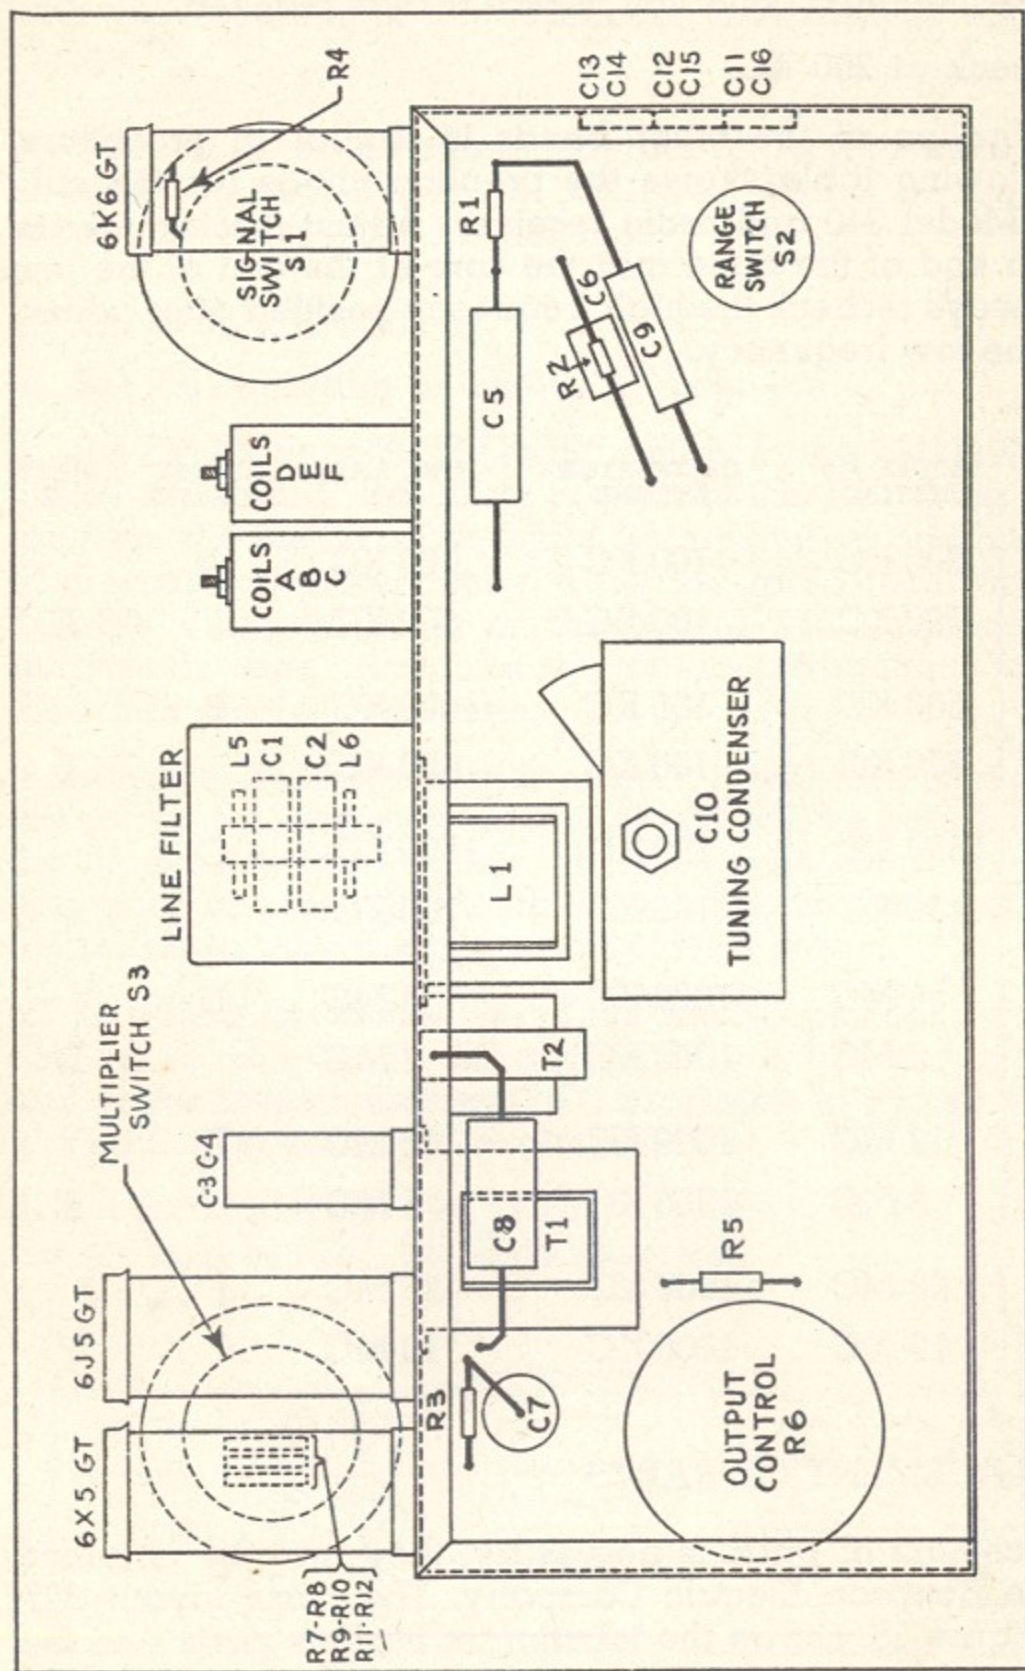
Rear View of Model 340 Chassis With Shield Removed Showing Location of Parts
